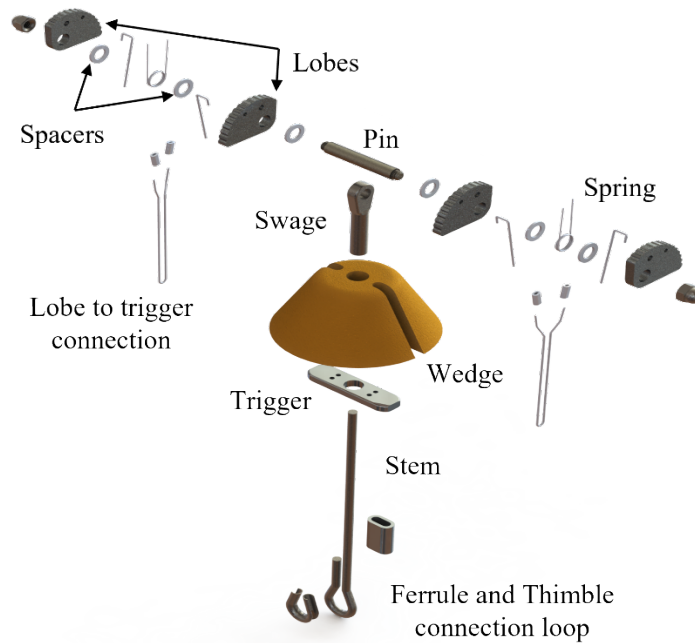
Exploded Assembly View of Cam from Senior Design Prototype
